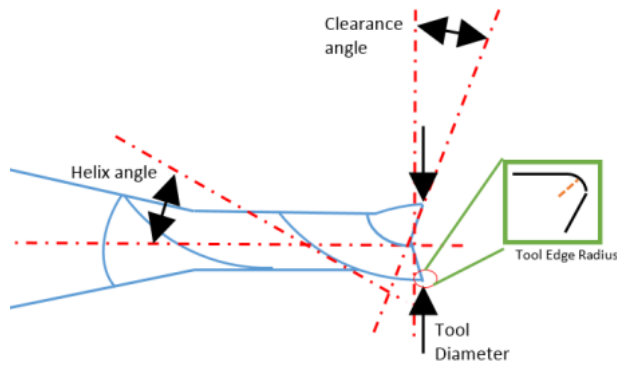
Micro tool geometries used in this experiment (Tool diameter: 1 mm; Number of flute: 2; Helix angle: 20 degrees; Rake angle: 0 degrees; Clearance angle: 17 degrees; and Tool edge radius: 3 μm)
